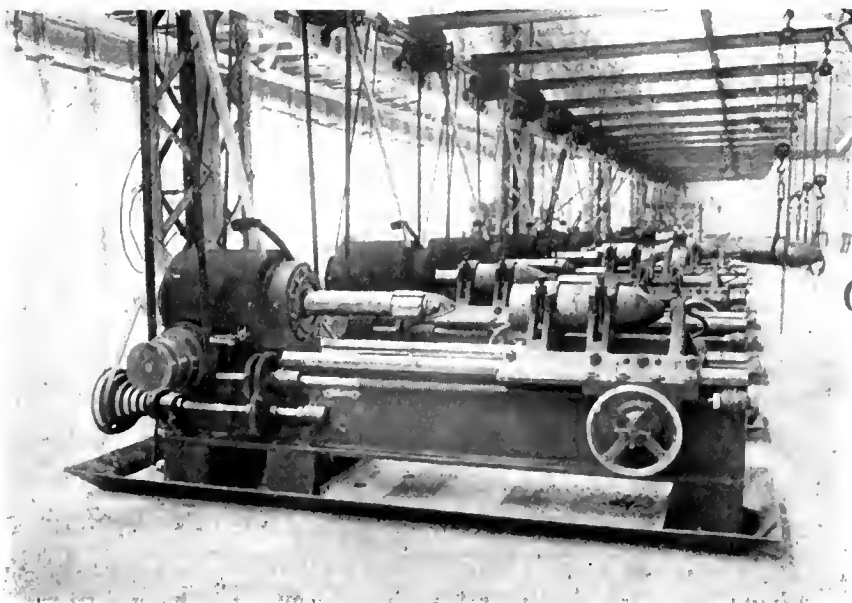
SPECIAL PURPOSE BORING LATHE FOR LARGE SHELLS.
